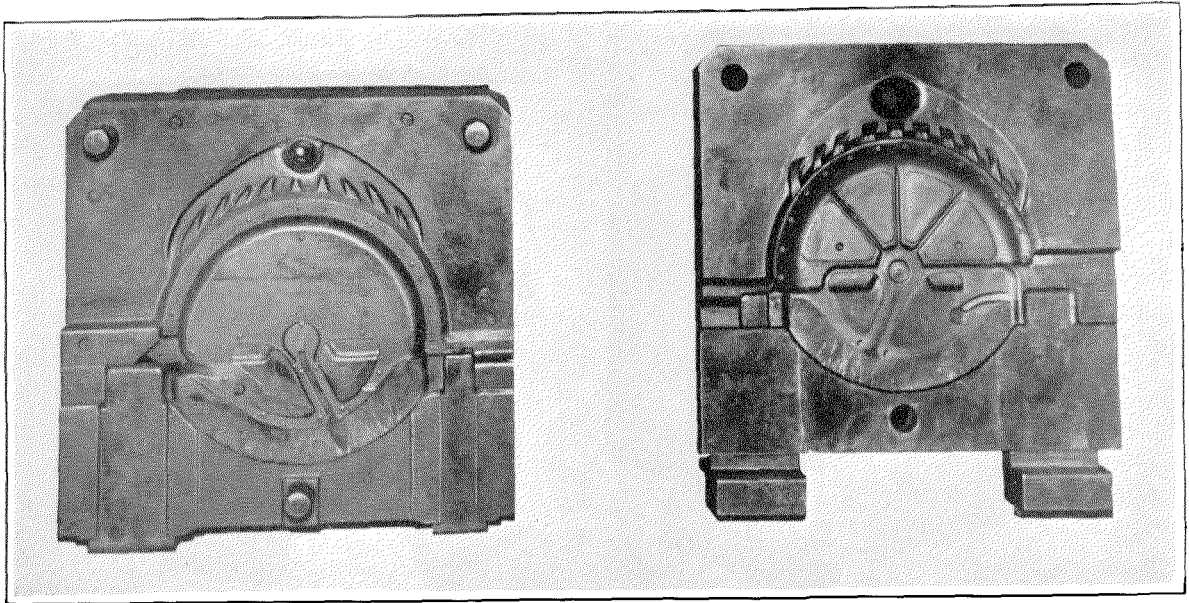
Mould for 200 Point Line Finder Type Switch shown in Fig. 7.
